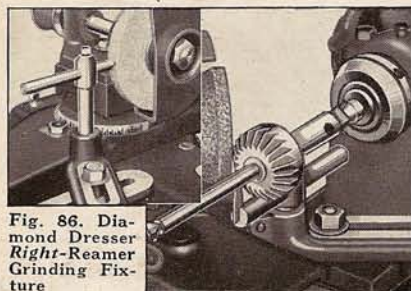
Diamond Dresser Right-Reamer Grinding Fixture
